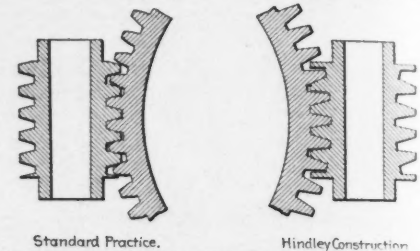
Section of the "Hindley" Worm and Wheel used in the Type "S" Electric Elevator, and the Usual Form of Worm and Wheel.
